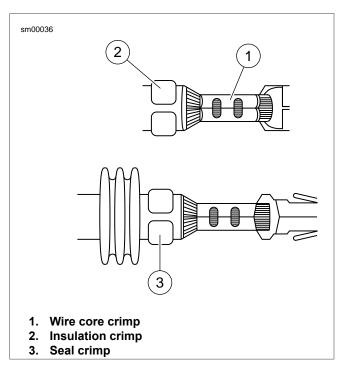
Metri-Pack Connector: Inspect Core and Insulation/Seal Crimps
